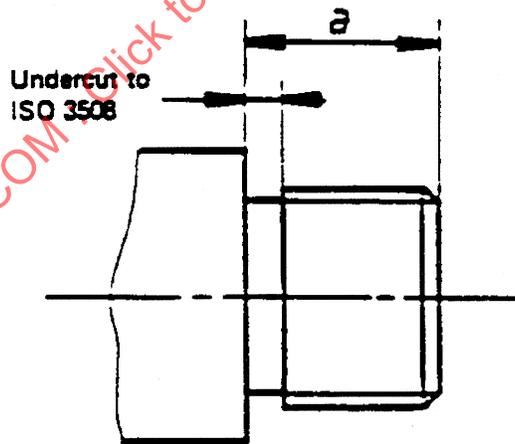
EXTERNAL THREADED CONNECTOR, TYPE 2
